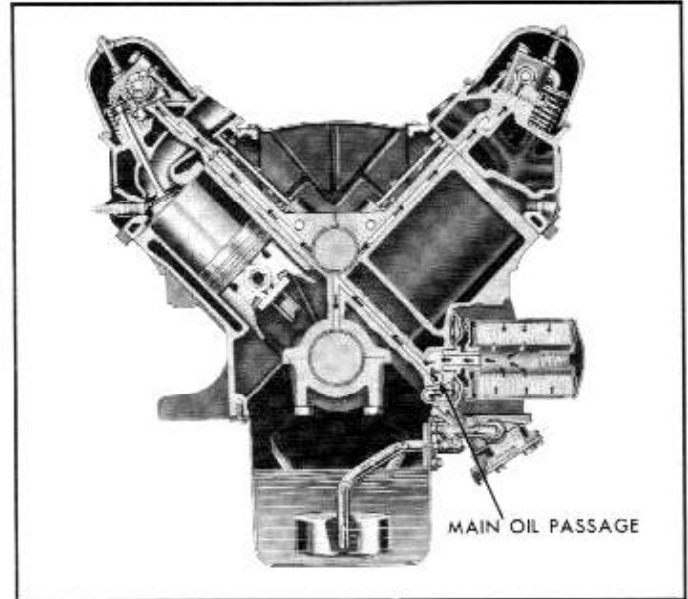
C-4—Lubrication System — 368 Cubic Inch Engine
